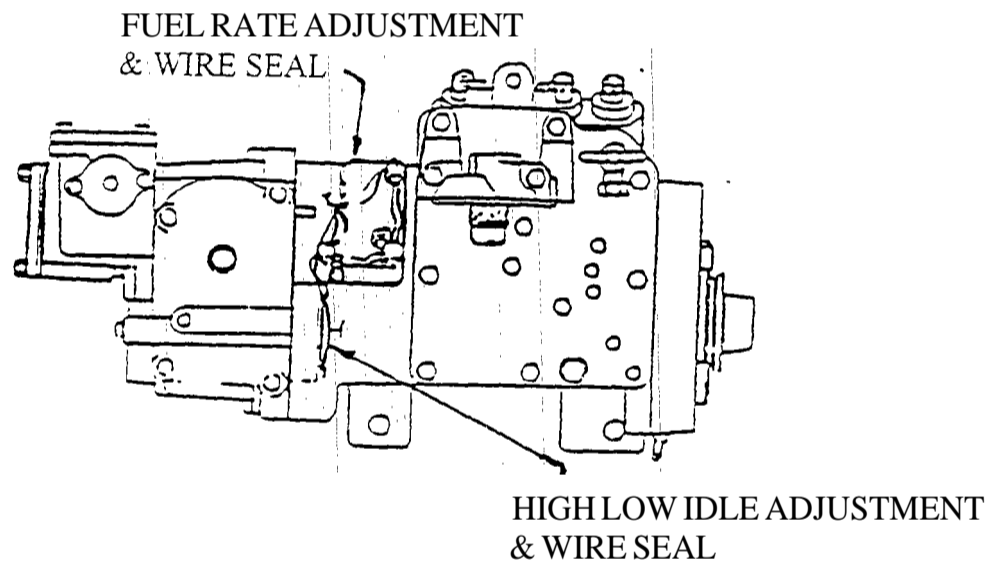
SEALED ENGINE ADJUSTMENTS
